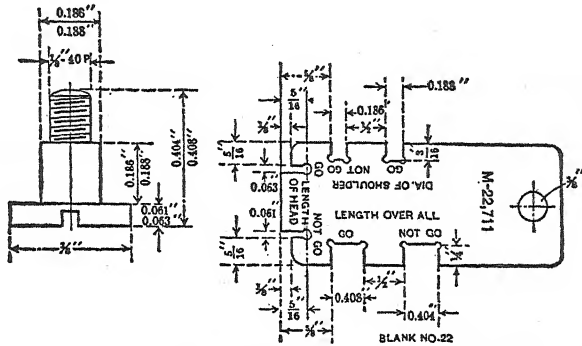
A Profile Gage for Gaging All Dimensions of the Screw Shown at the Left.
